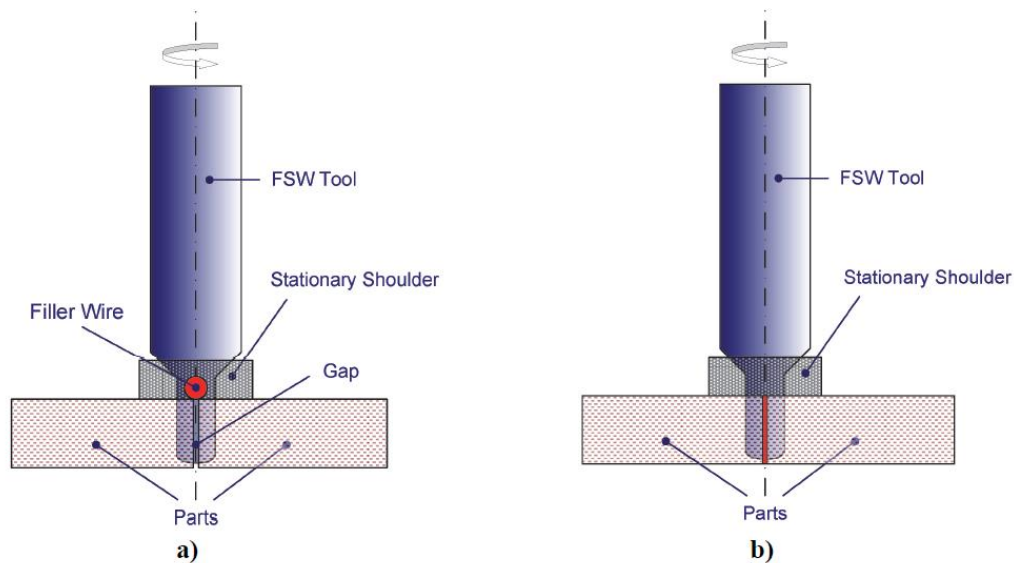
The AdStir principle applied to butt-joints: a) Front of the tool and shoulder and b) Rear of the tool and shoulder (Martin, 2013).
